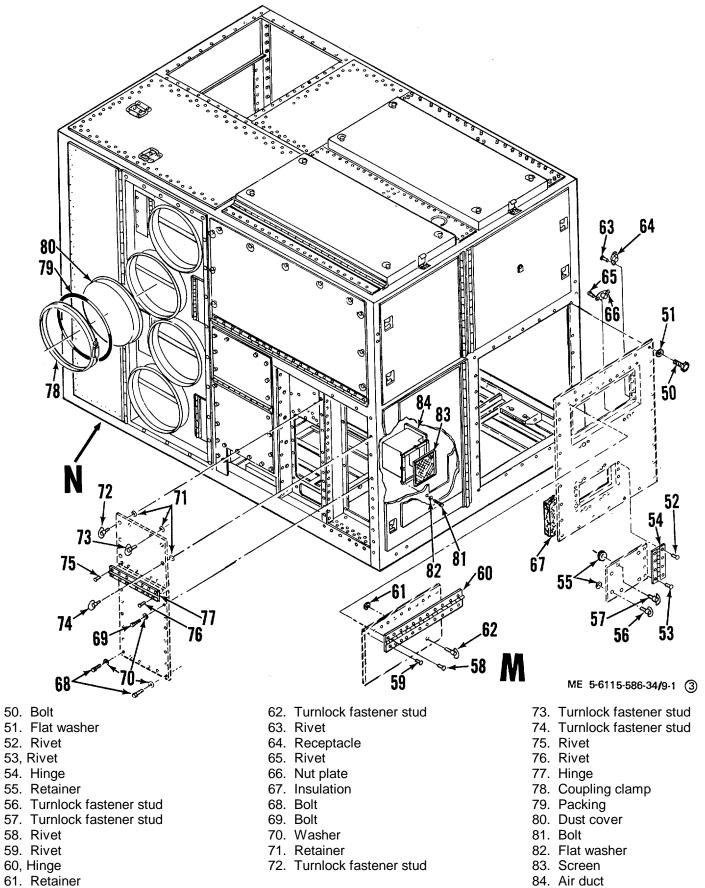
Enclosure assembly, exploded view. (sheet 3 of 10)
